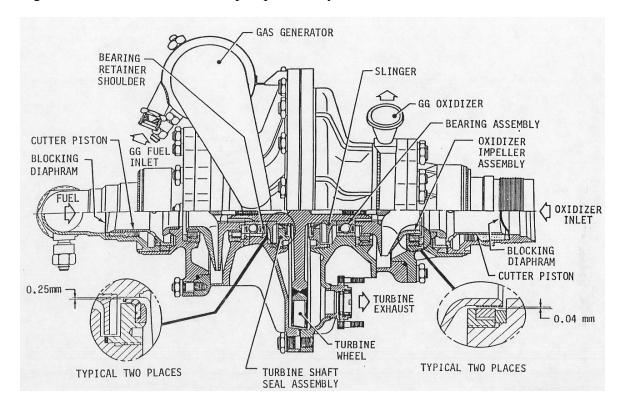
Figure IV.VIII.LIV - SA-2 turbo-pump assembly
